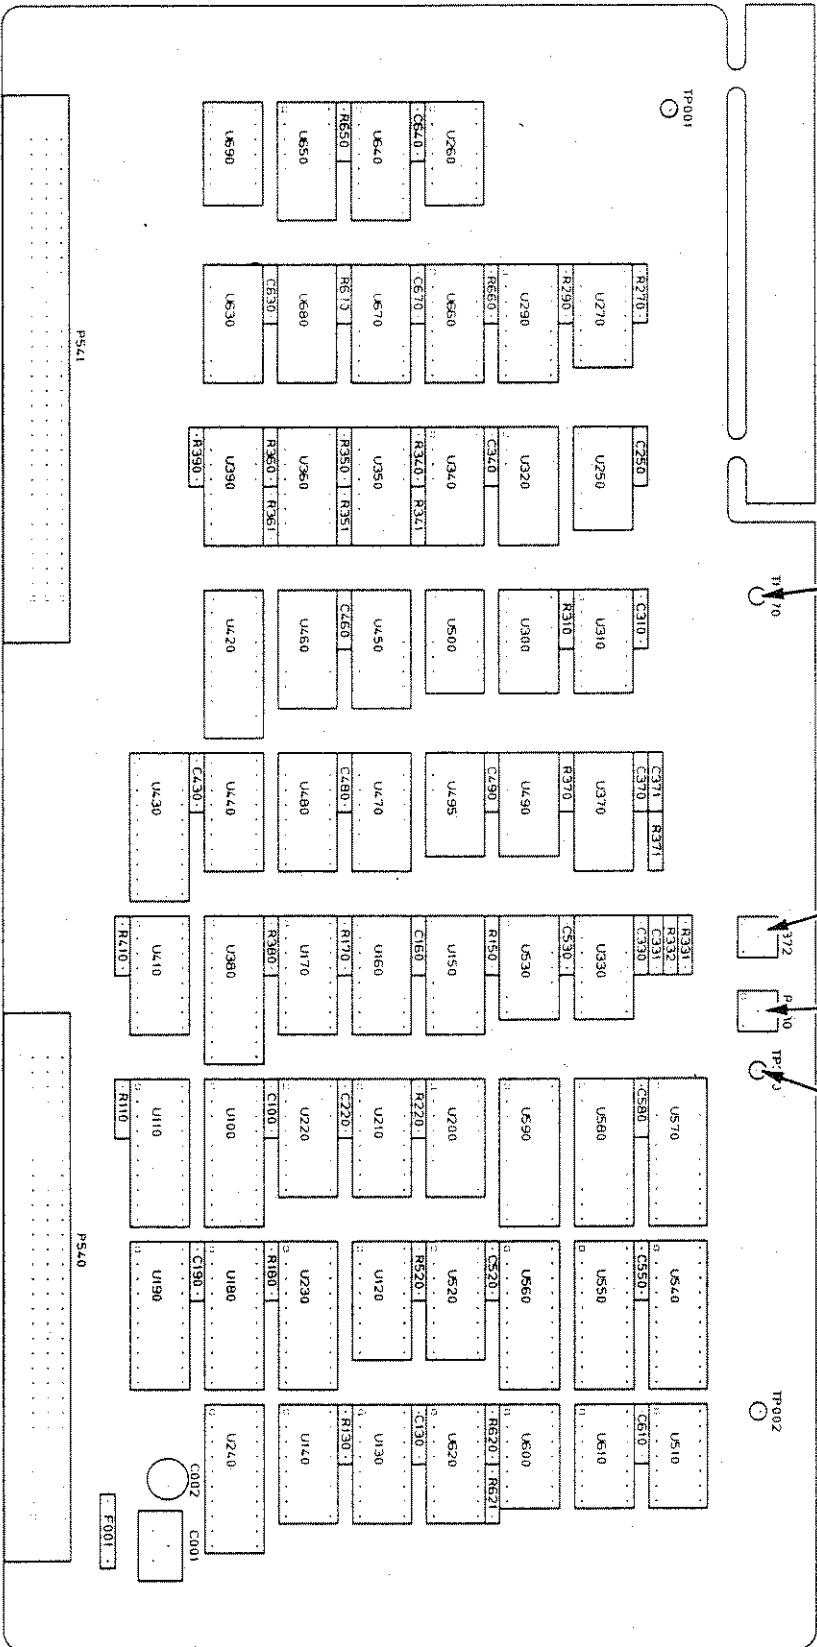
A54 - Display Control Board Adjustment Locations
